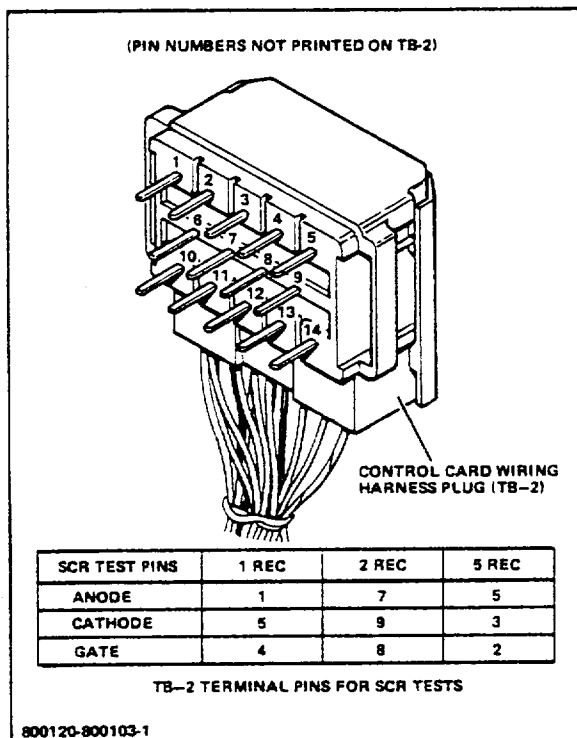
TB-2 Terminal Pins For SCR Tests
